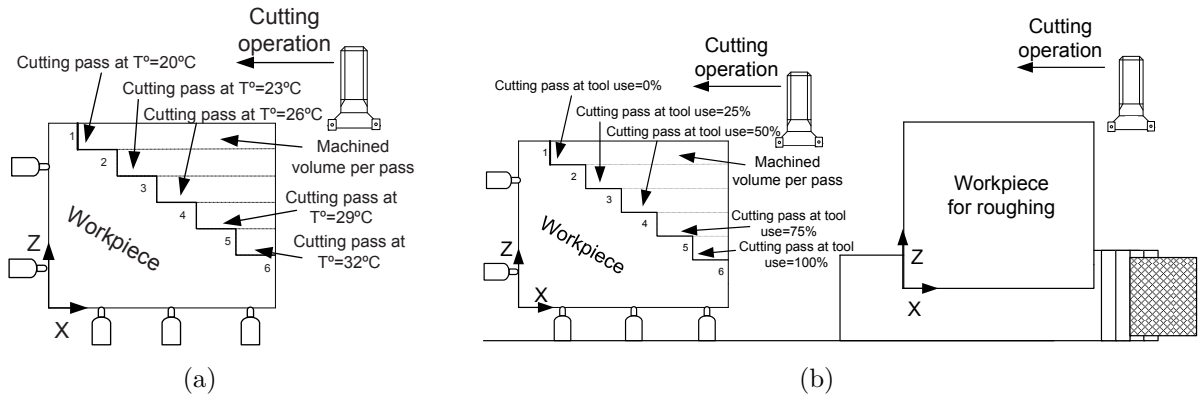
Experimentation to model machining-induced variations due to a) spindle thermal effects, and b) cutting-tool wear.
